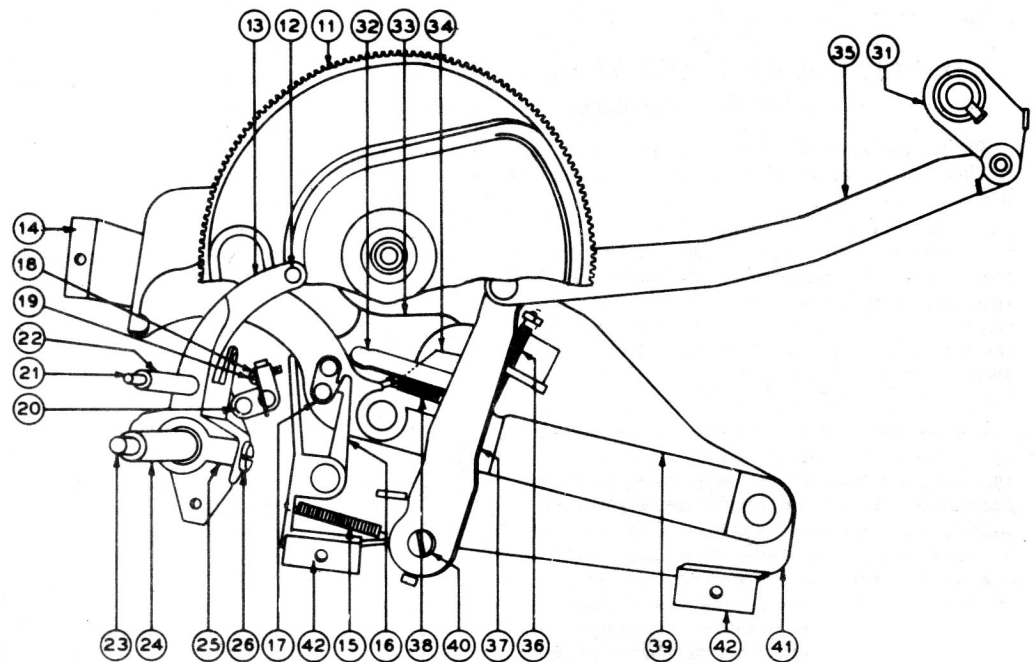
CUTAWAY VIEW SHOWING PARTS UNDER SUB-PLATE ASSEMBLY (83) FIG. 3
